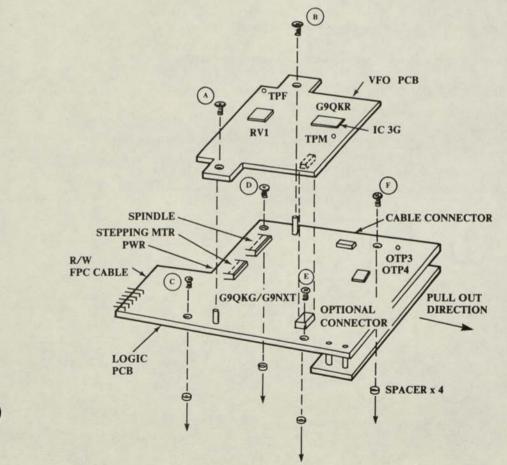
PCB Diassembly/Assembly (Disk Drive)
